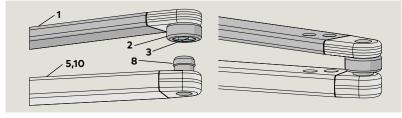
Arm assemblies attached to door, ED100LE
